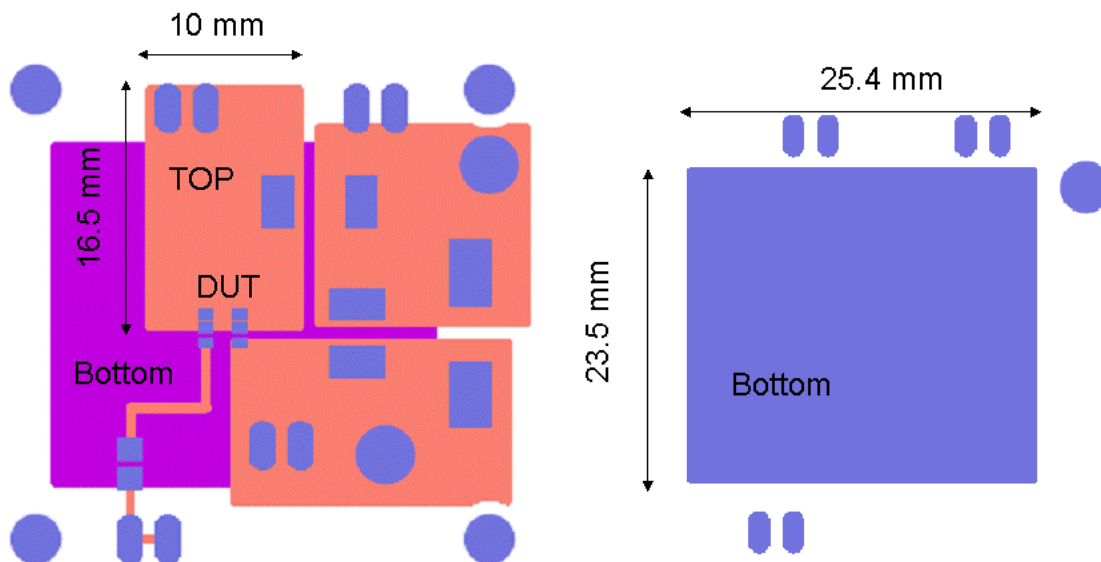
Smaller Ground Plane Test Board Layout (10 mm x 16.5mm Top copper plane, 25.4 x 23.5 mm bottom copper plane. The board outline is 38 mm x 38 mm.)
